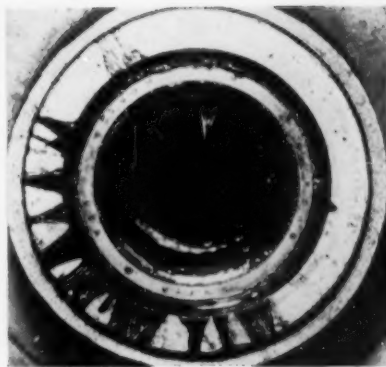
C—Inner Bearing and Seal of Heavy Duty Truck Front Wheel After 20,000 Miles Using Grease D.
